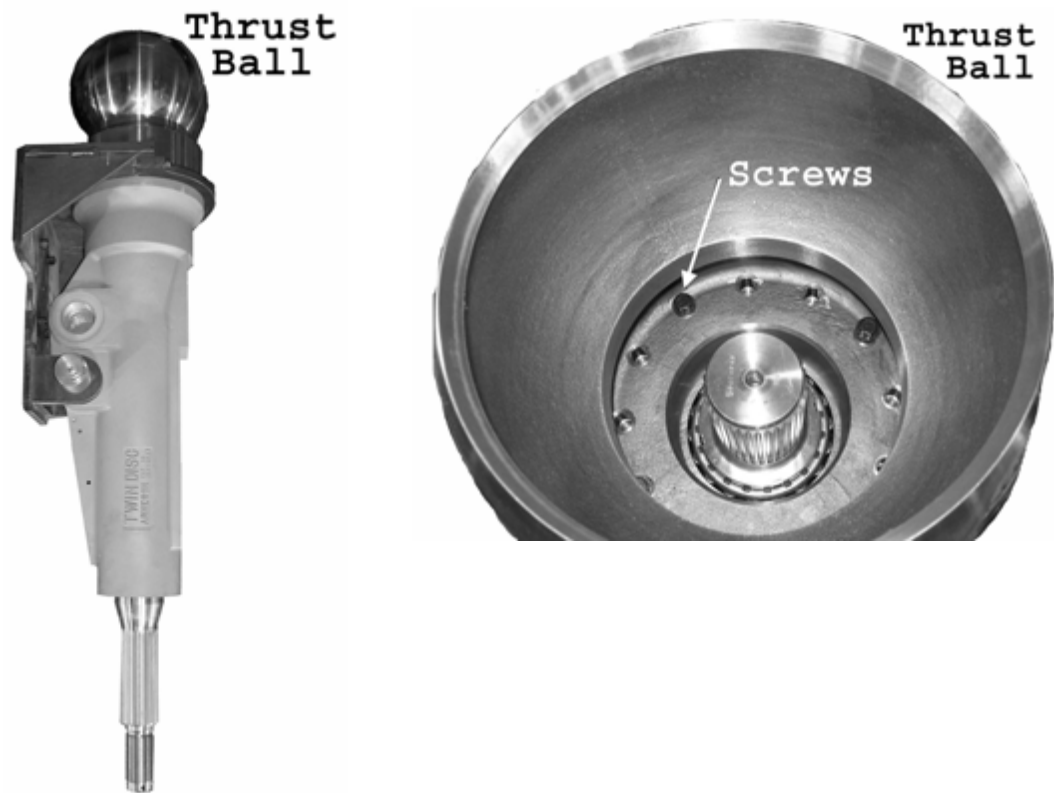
Rotate Thrust Tube Assembly so Ball is Up, Remove 12-point Capscrews
